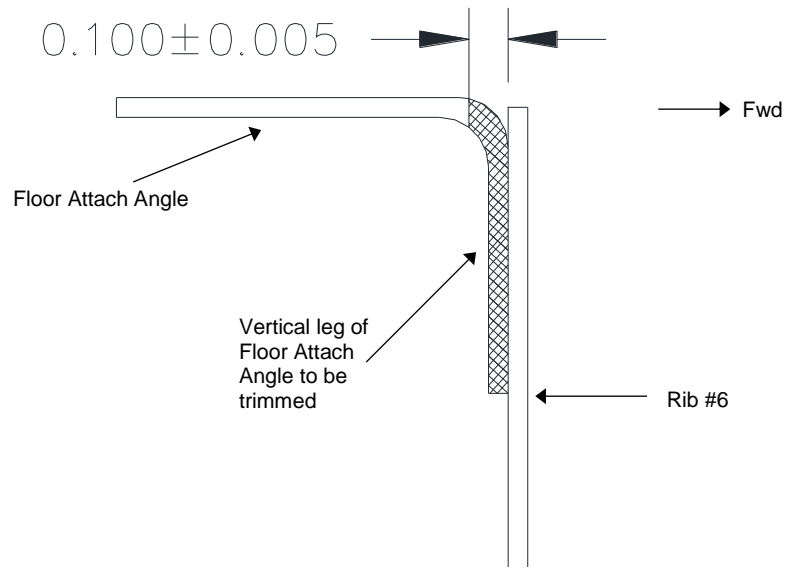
Section A-A. Trimming of Floor Attach Angle - Side view of Rib #6.
